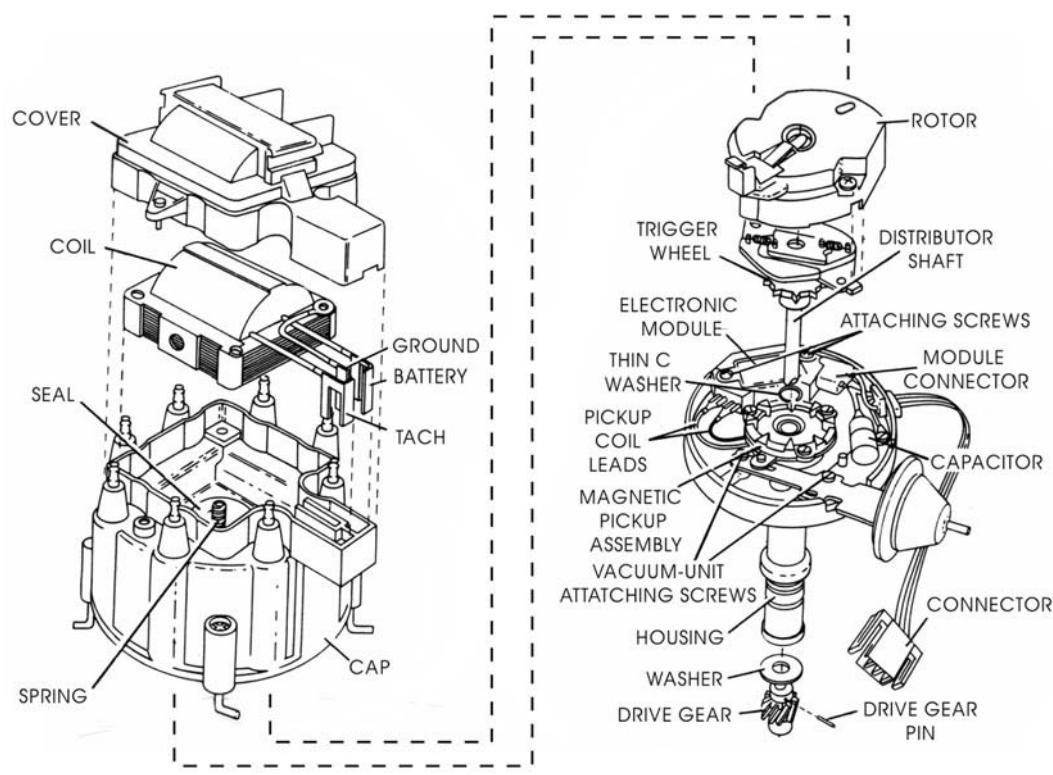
Shown here is an exploded view of an electronic-ignition distributor that contains a multiple-pole pickup coil.
